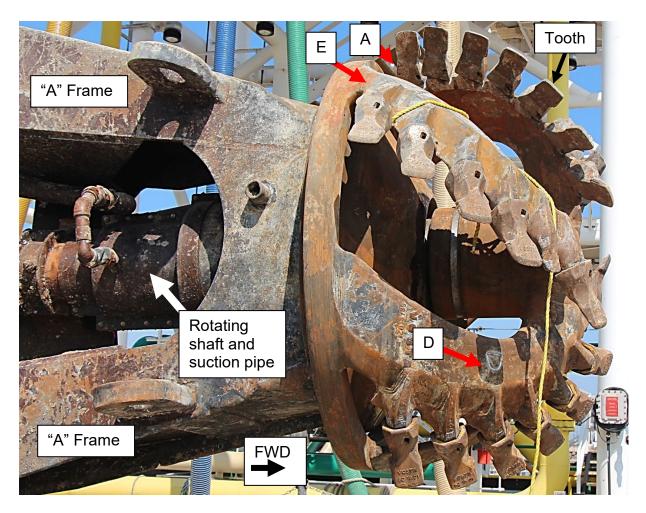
Top view of the "A" frame showing the side profile of the cutterhead assembly after underwater recovery. The side profile of the cutterhead assembly follows a conical-elliptical-like contour. Blades "A", "D", and "E" are shown in this view.
